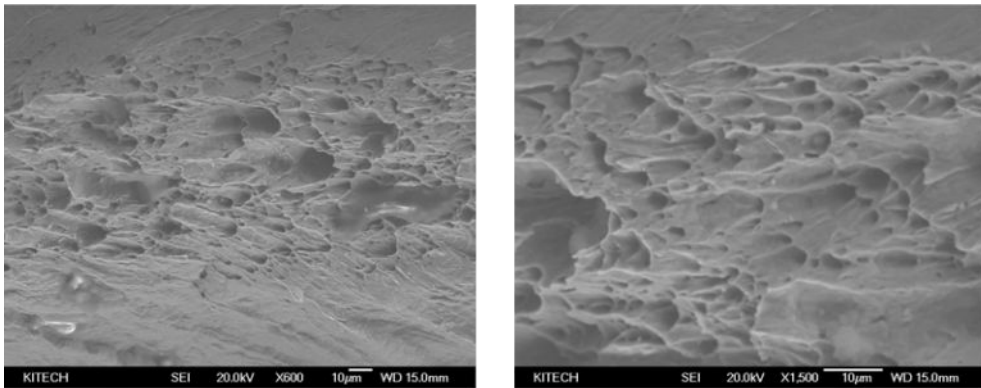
SEM observation of fracture surface after tensile test for end part of welded specimen
